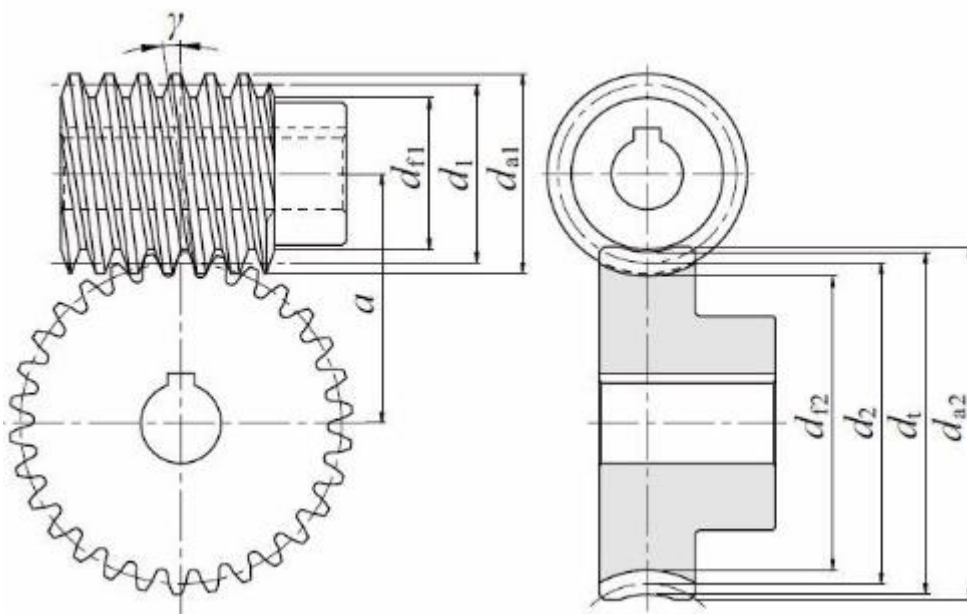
| Cylindrical Worm Gear pair (KHK Gears, s.f.)
